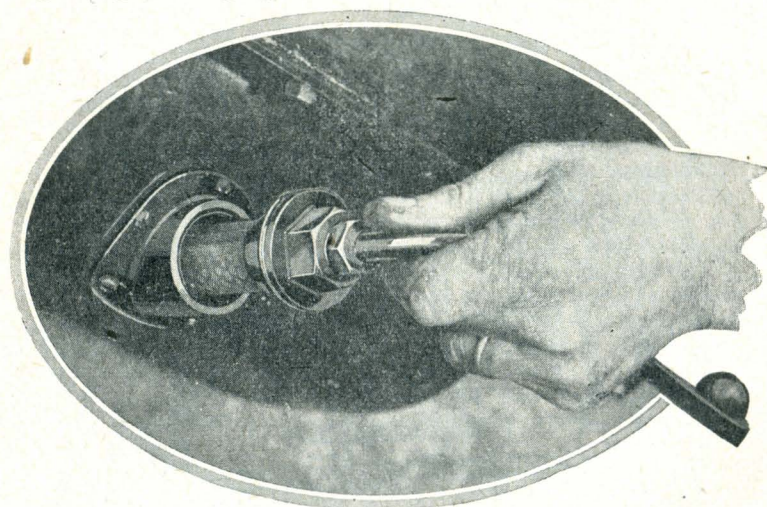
REMOVING OIL FILTER FROM SUMP FOR CLEANING PURPOSES
